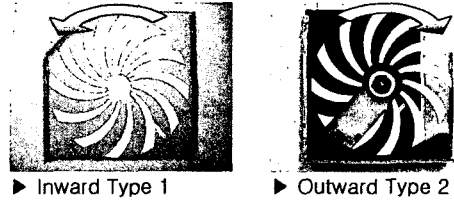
Pumping Type Thrust Bearing of Top cover and Disc tray
